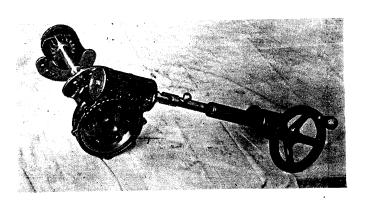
ELEVATING MECHANISM ASSEMBLY
